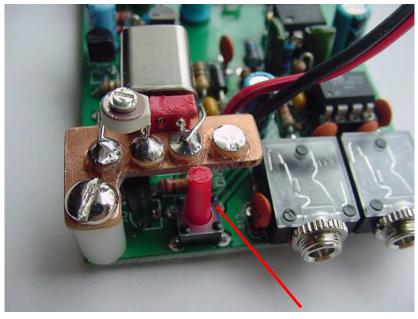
Mounting View. (Singed button not supplied in kit -- results of hooking up power leads after all parts were installed.)
